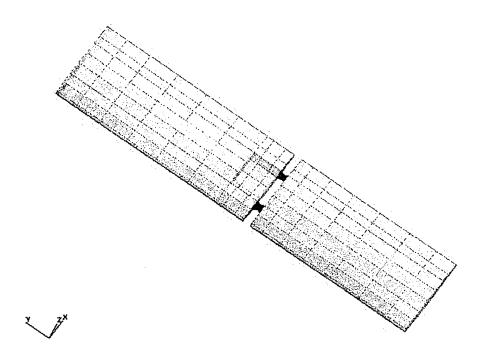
Current Horizontal Stabilizer Tail-Fold Design
